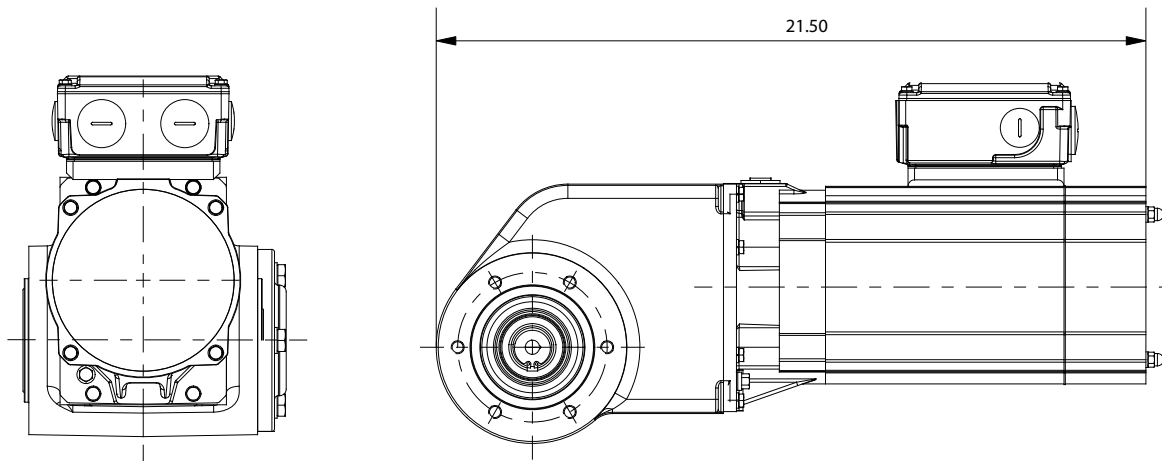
Dimensions of the VLT® OneGearDrive with Mechanical Brake Option
